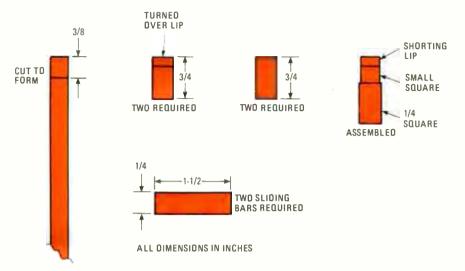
The sliding bar is made up of the larger 1/4 inch stock so the slider bars will ride or float outside the larger piece. A brush is formed on the end of the pointer.
